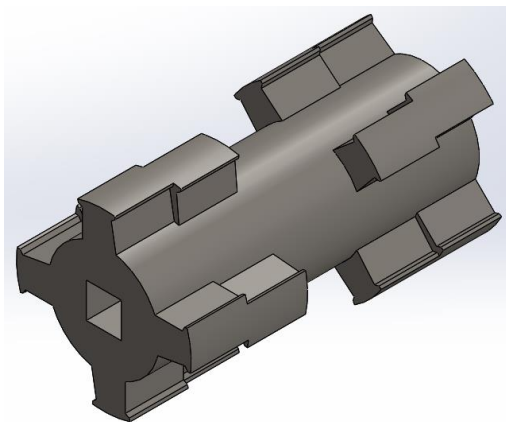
3D view of the step skewed rotor for torque ripple reduction.
